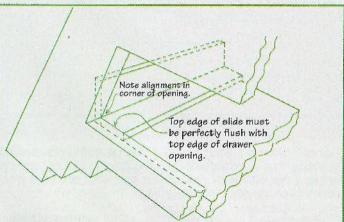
Make sure that the drawer slide and guide assemblies are correctly installed; test-fit the drawers to check alignment.
